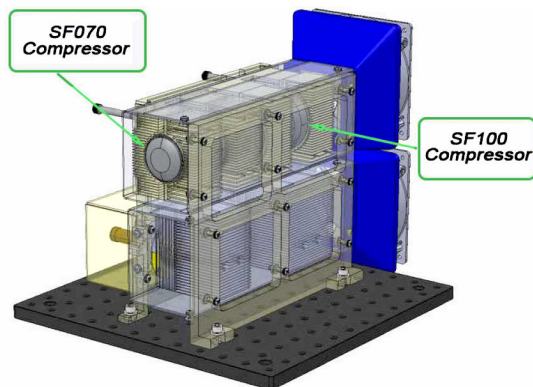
Cryocooler Subsystem Test Setup – Cryocooler Housing View
